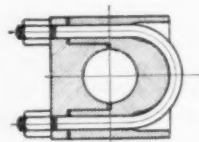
PUNCH SHANK CLAMPING U-BOLT
